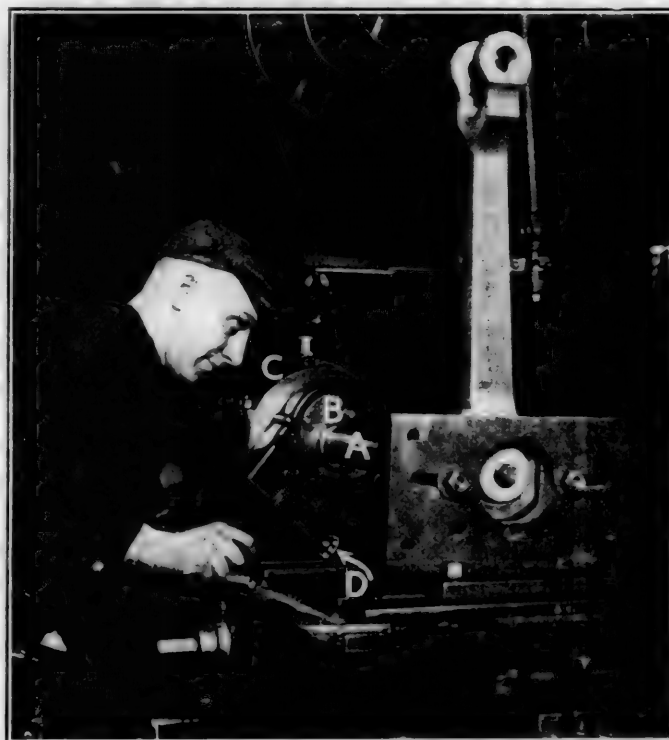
Internal Grinding Machine Finishing a Bearing in a Valve Motion Link
